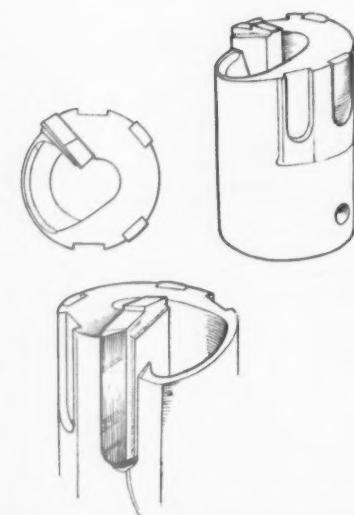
Details of the trepanning cutters. The heads are manufactured from a high-tensile steel body with a single tungsten-carbide tool bit
